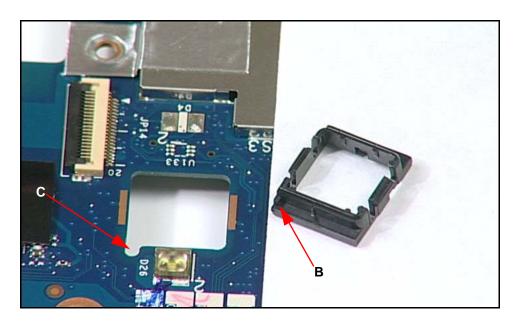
Align Rear CCD Holder Guide with Mainboard Slot
